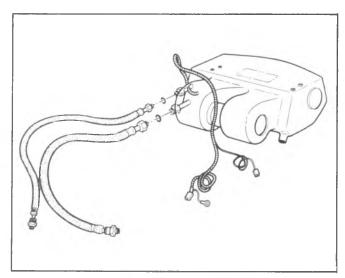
B-71--Blower-Evaporator (Motor Home Chassis Units)
